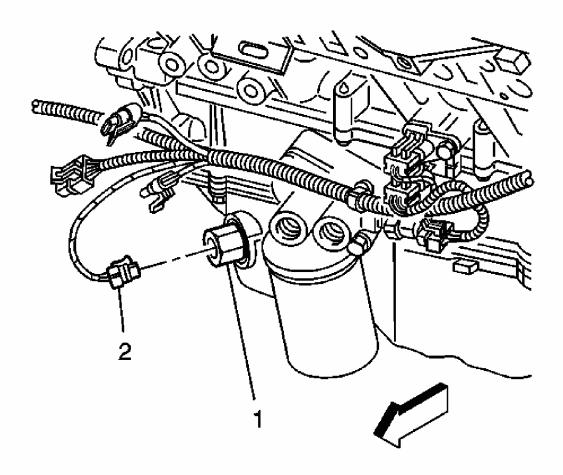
View of Engine Oil Level Sensor & Electrical Connector Courtesy of GENERAL MOTORS CORP.
